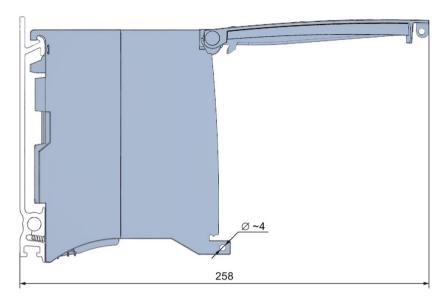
Dimensional drawing of the CPU 1511T-1 PN, side view with front panel open
